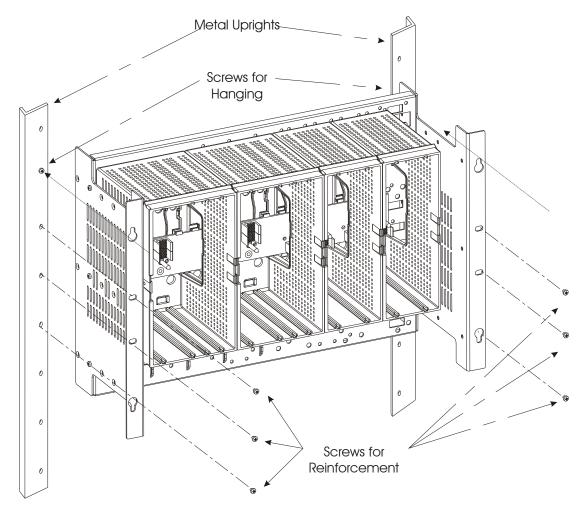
Installation of ACE3600 RTU 19" Frame in Rack Unit - Exploded View
